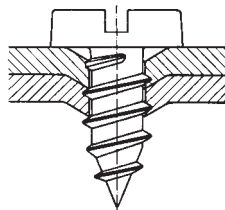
Fastening with pierced or extruded core hole (for thin sheets)
